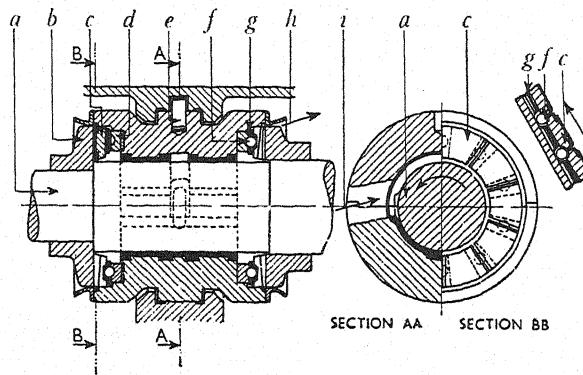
Pad Thrust Bearing for Equal Thrust in Both Directions
